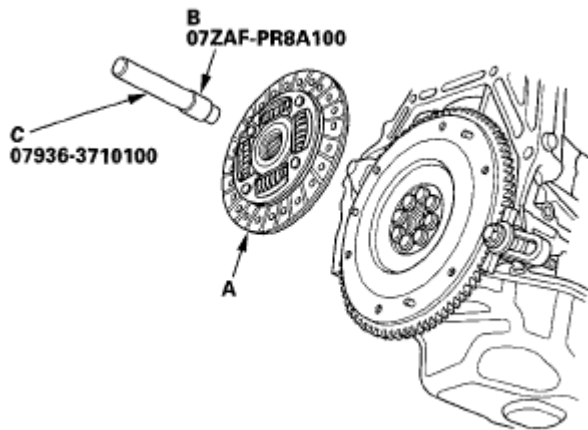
Identifying Clutch Disc, Clutch Alignment Shaft And Remover Handle
